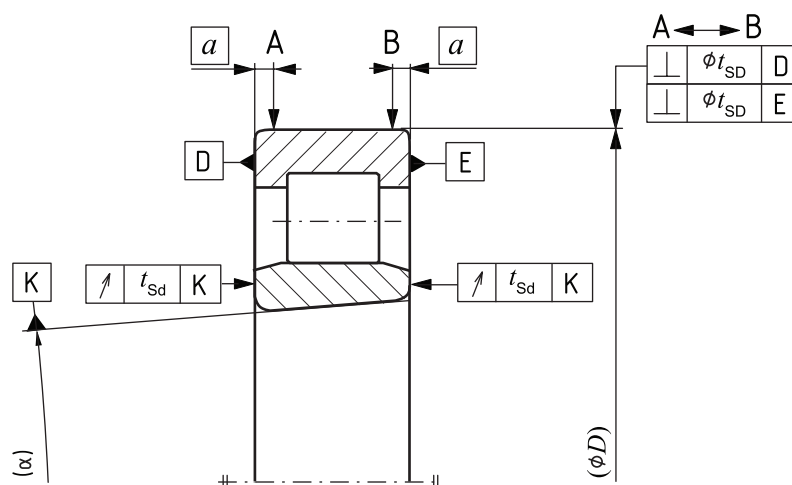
Geometrical tolerances for single components of bearing with tapered bore
